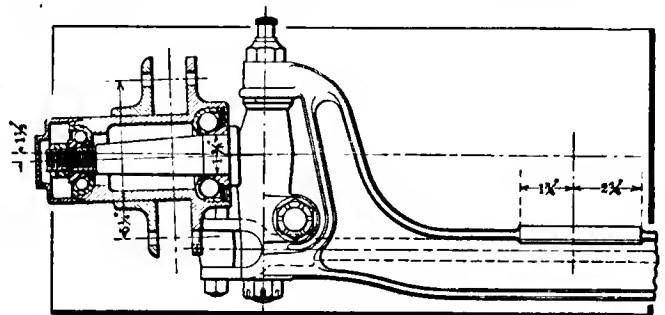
Elliott type of steering knuckle with eye section axle and cup and cone ball bearings
